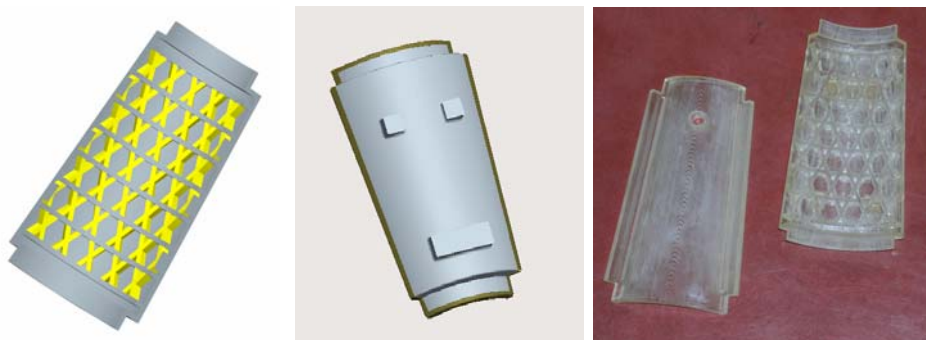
3D CAD drawings of conical isogrid lattice structures and the relative rapid prototyped negative moulds
